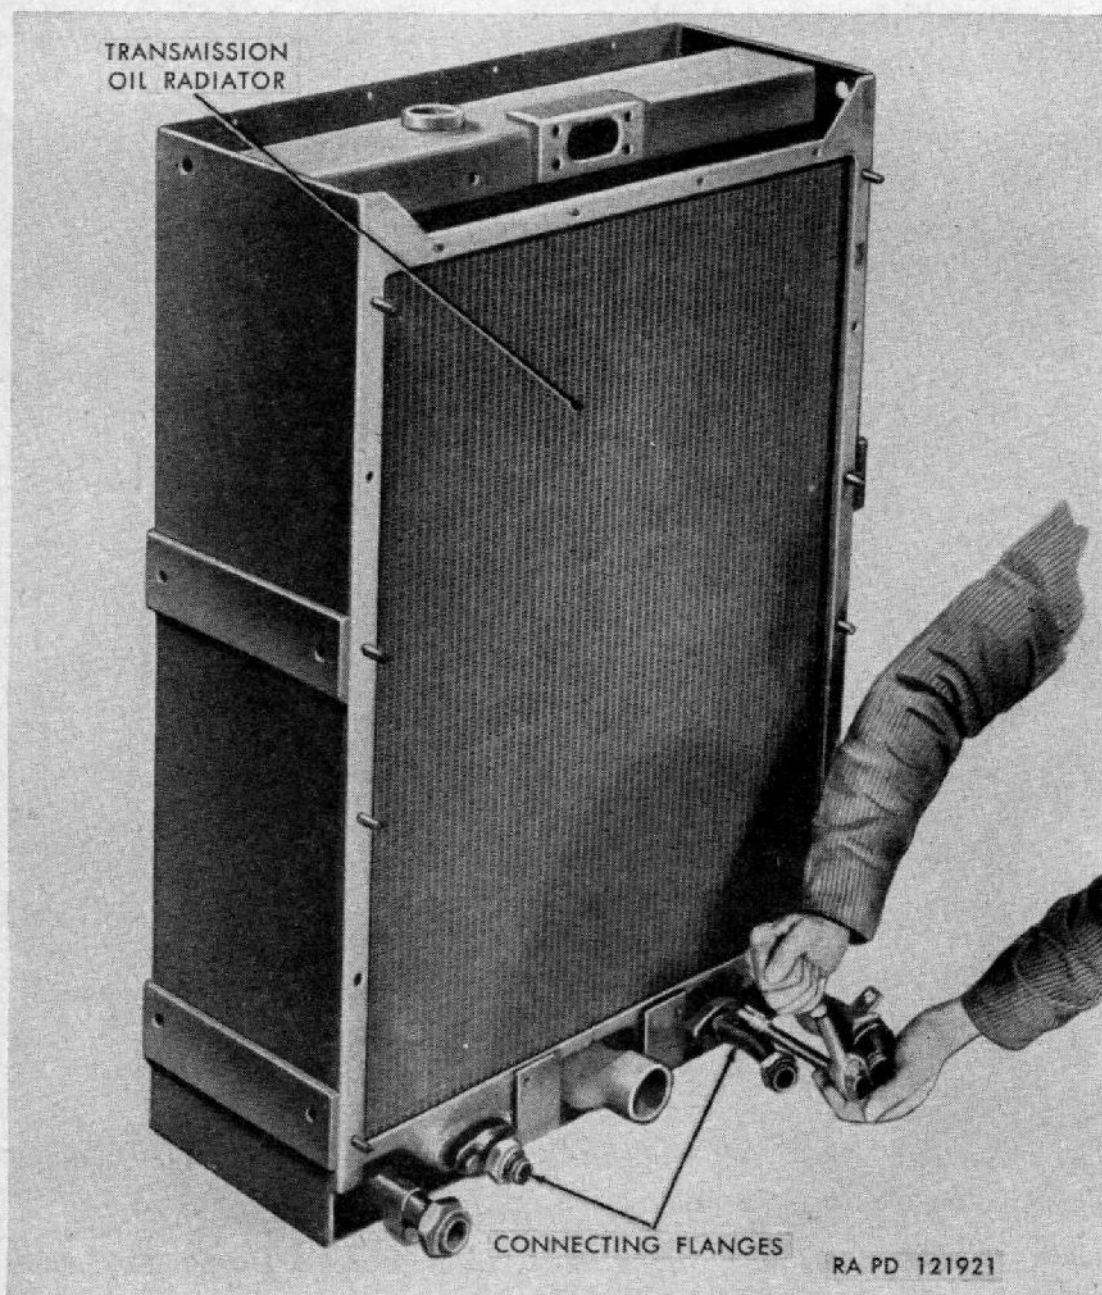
Removing hose connecting flanges from transmission oil radiator.
